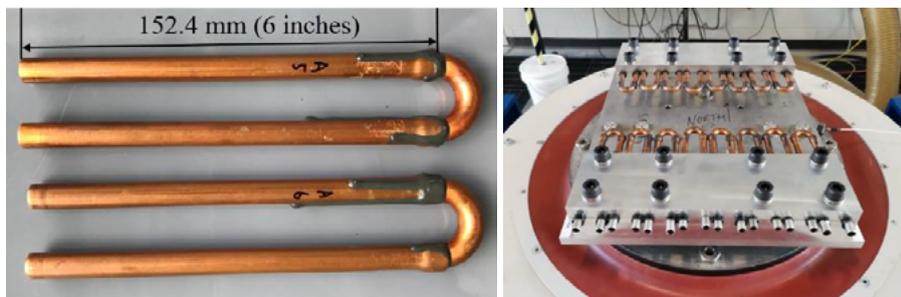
Photographs of the U-shape joints with adhesive (left) and the fixtures containing a set of 8 samples each installed on the vibration shaker test stand.
